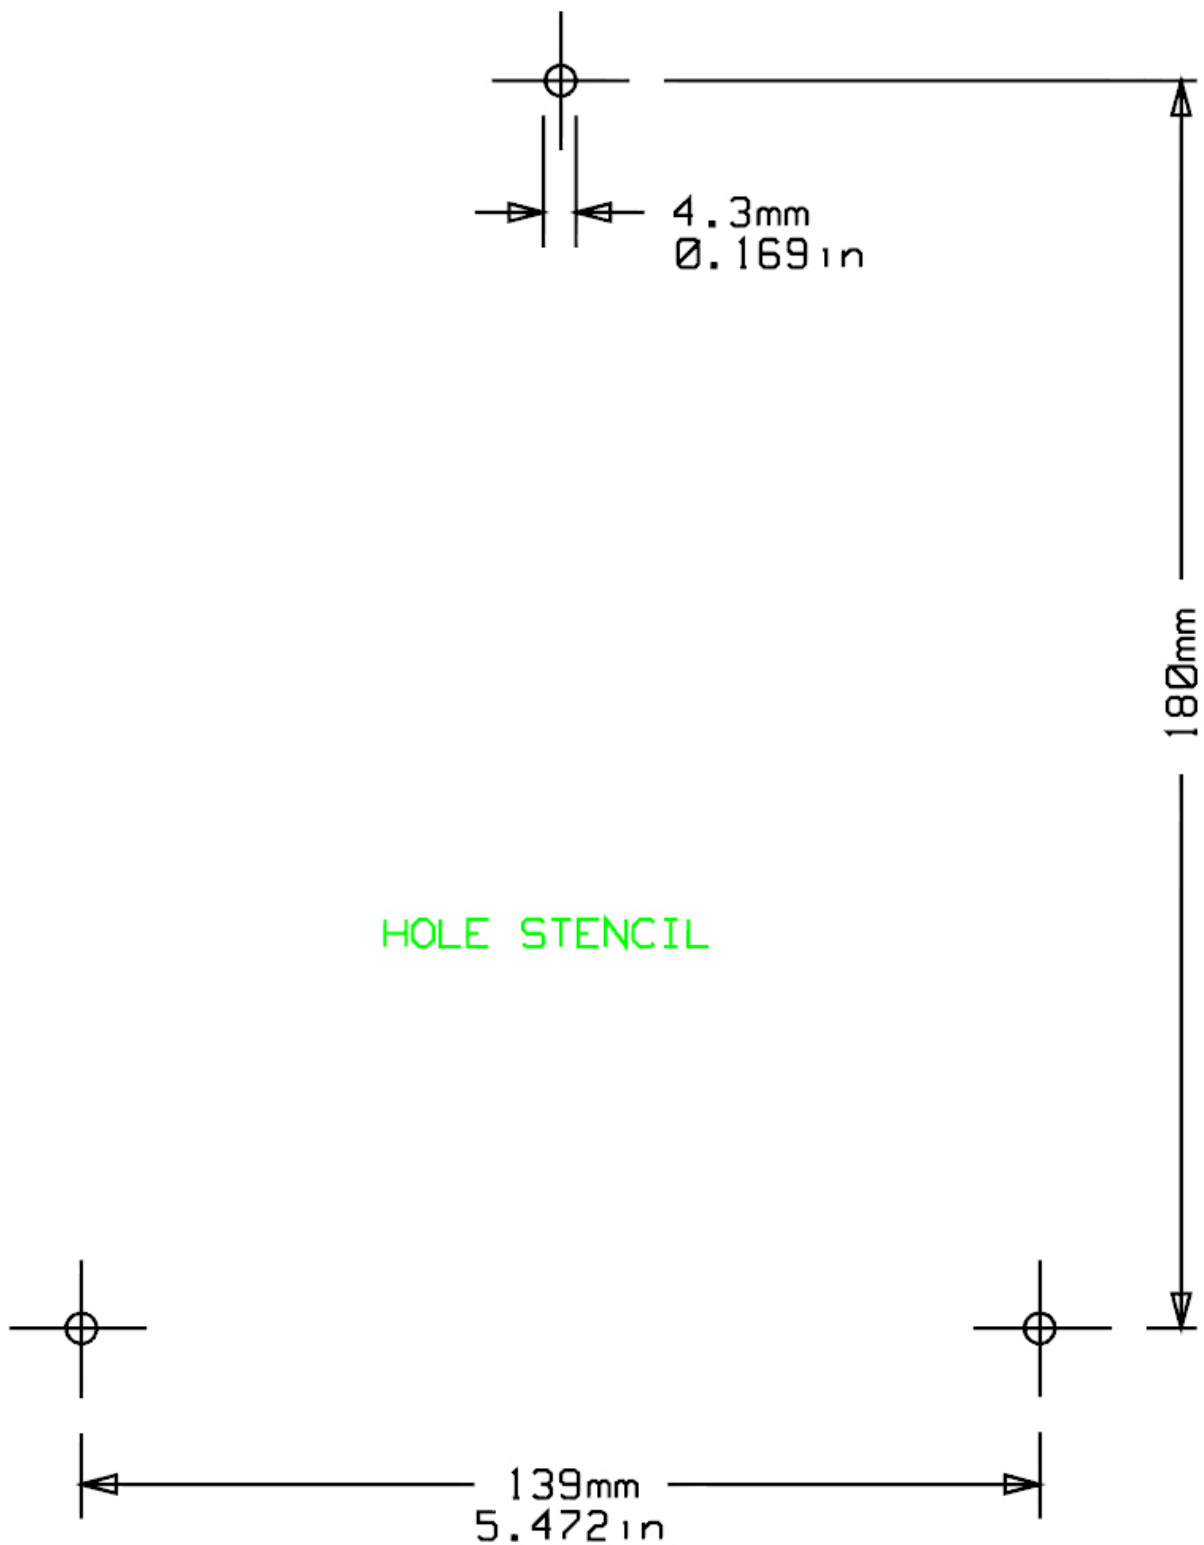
Drilling template GK61X for vehicle mounting bracket (no scale drawing)
